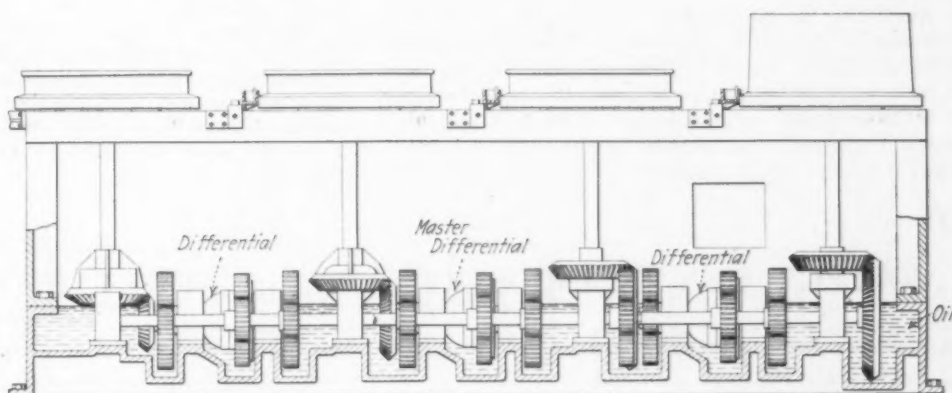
(at Right).—Elevation and Partial Section of the Four-Block Machine, Showing Location of Oil Surrounding the Lower Portions of All of the Gearing Sets
